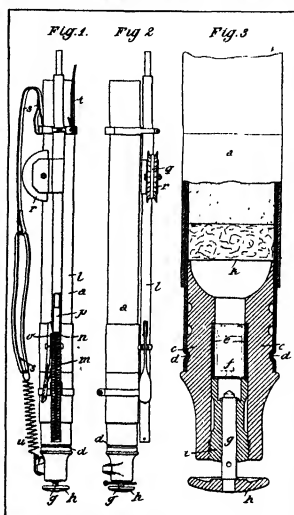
Section of the gun. Fig. 2.—Front view. Fig. 3.—Section of breech.
